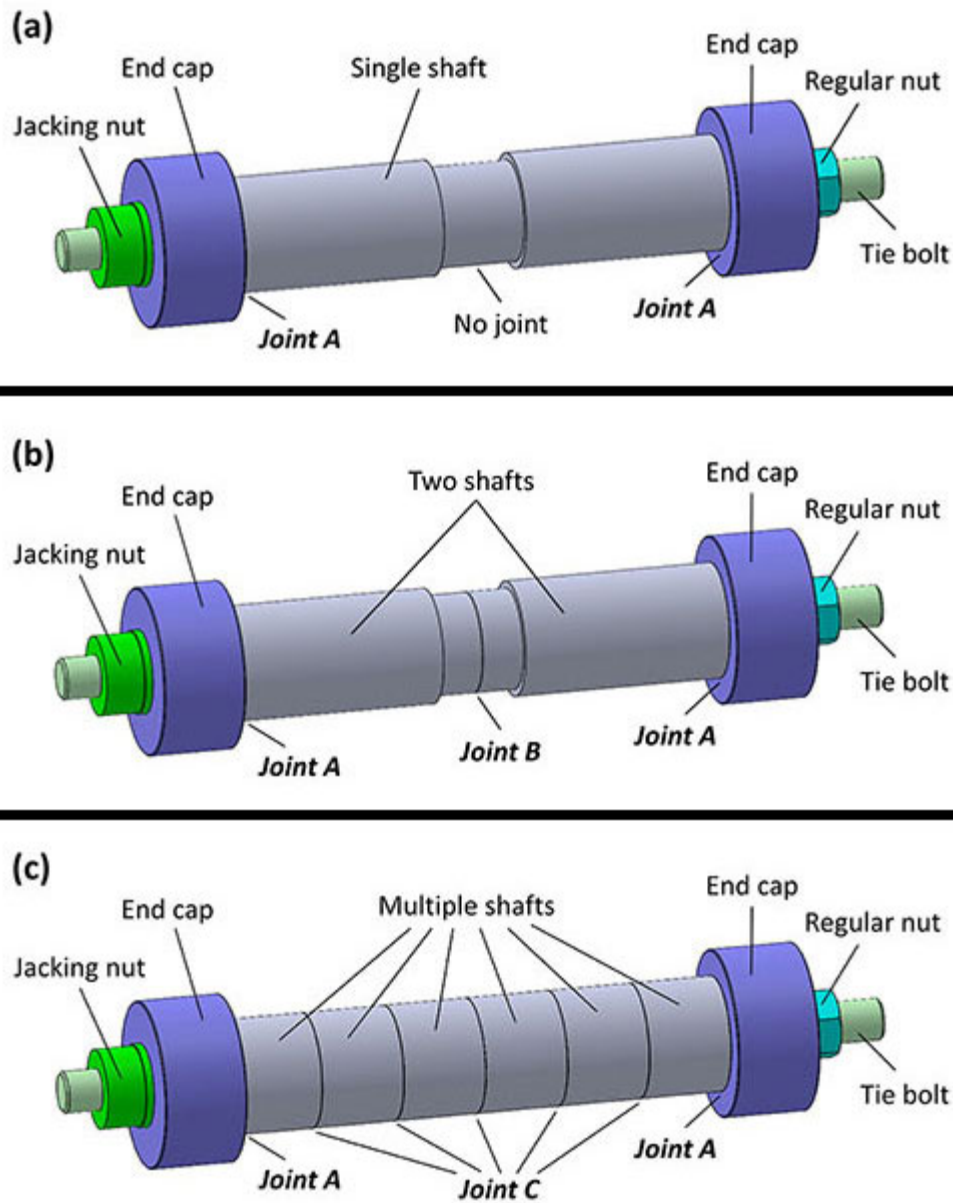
Model of tie bolt rotor test articles: (a) solid shaft, (b) two-piece shaft, (c) multi-piece shaft
